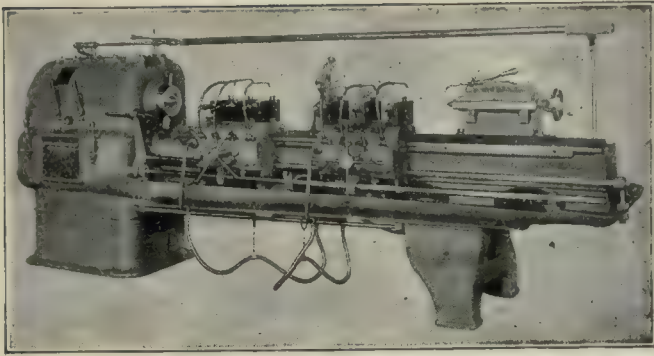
TYPE OF MACHINE TOOL USED IN TESTS. EIGHT-INCH LO-SWING LATHE
